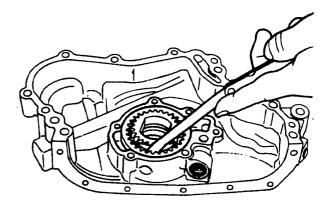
CHECKING CLEARANCE BETWEEN INNER GEAR TOOTH END AND CRESCENT
